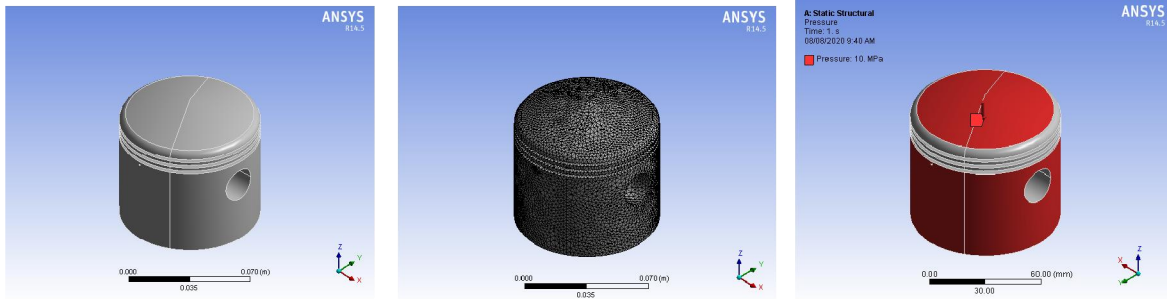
(a) Piston-ring-Liner assembly (b) Model Piston-Ring-Liner Assembly
